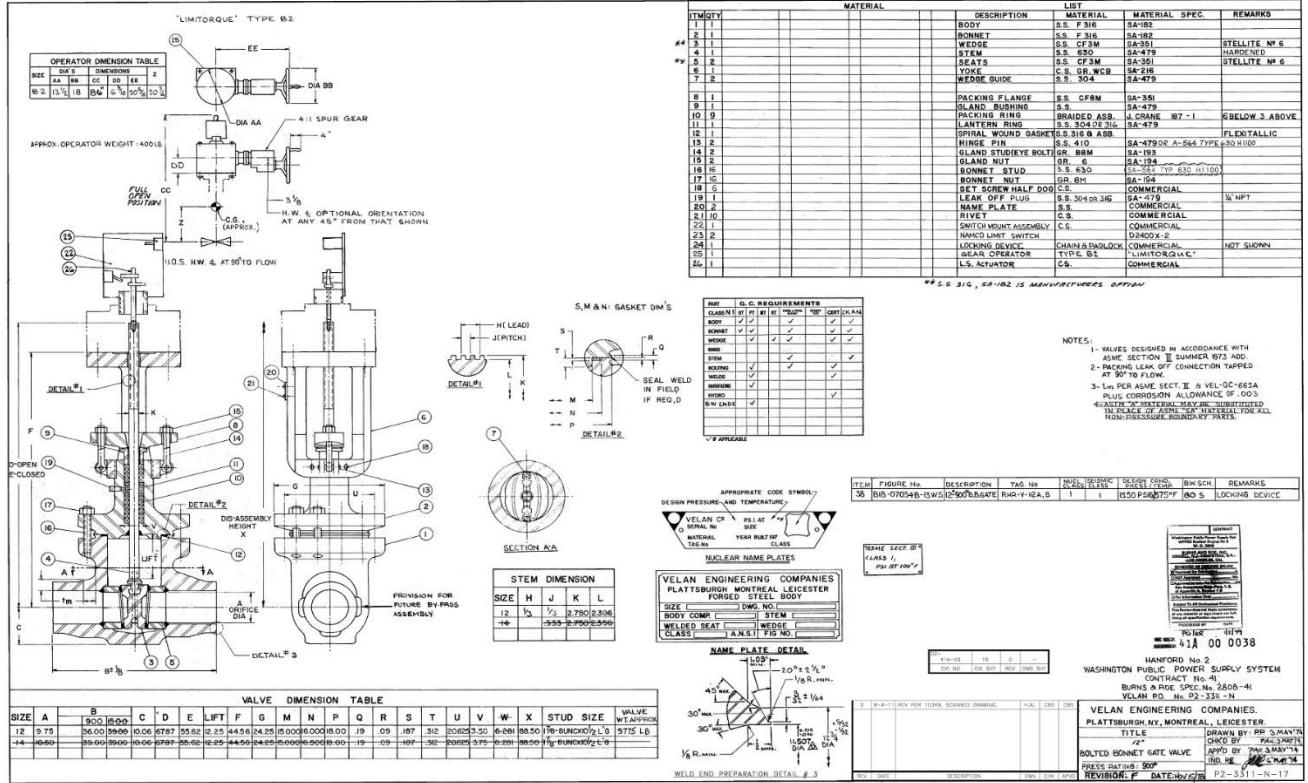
ISI-18.4 Valve taper on RRC-V-60A for weld 24RRC(1)A-15
